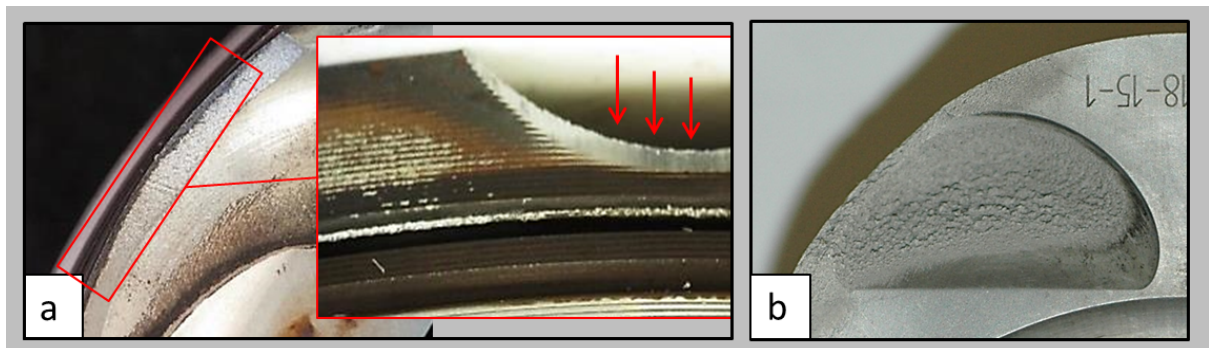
(a) Stereo-microscopy images at the intake valve relief, medium knocking erosion and tiny ring groove closure. (b) Macrograph at the exhaust valve relief, heavier knocking conditions: erosion is more pronounced [29].
